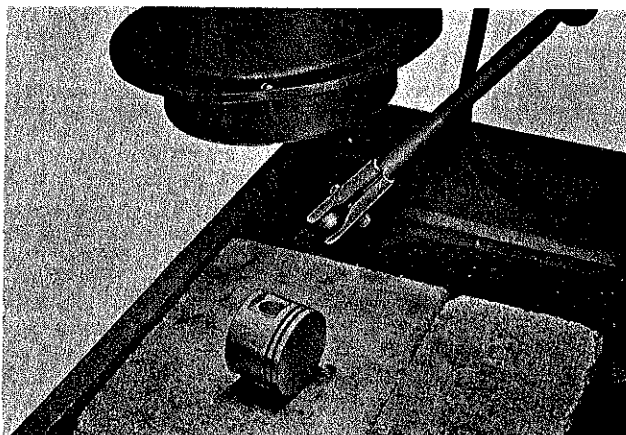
Heating a piston under a heat lamp prior to installation of the piston pin bearings.
